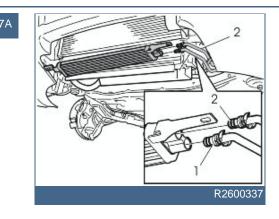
Illustration A shows how the hoses are connected to the gearbox and oil cooler
